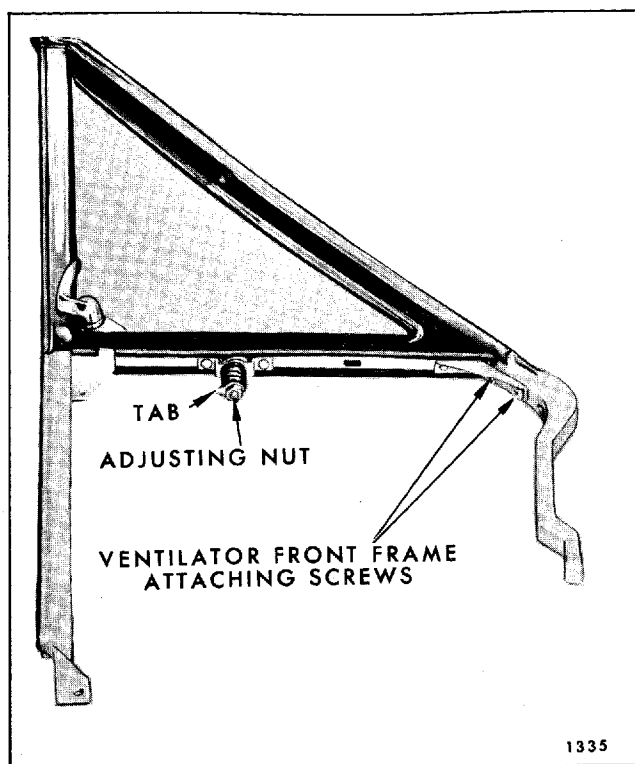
Front Door Ventilator Assembly - "A" Style
